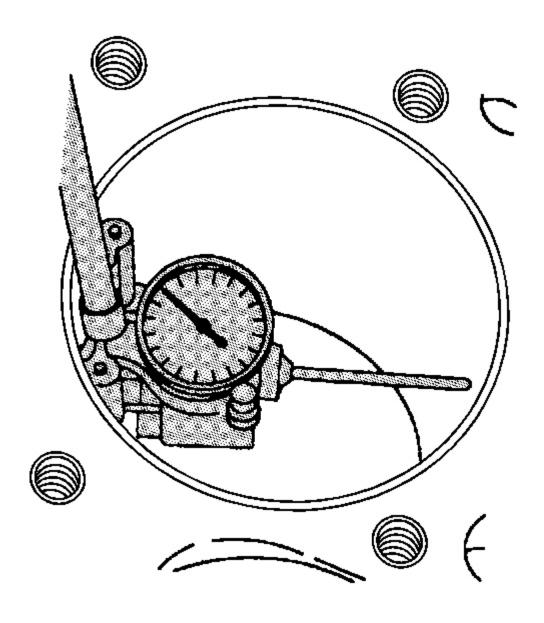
Measuring Cylinder Bore Courtesy of GENERAL MOTORS CORP.
